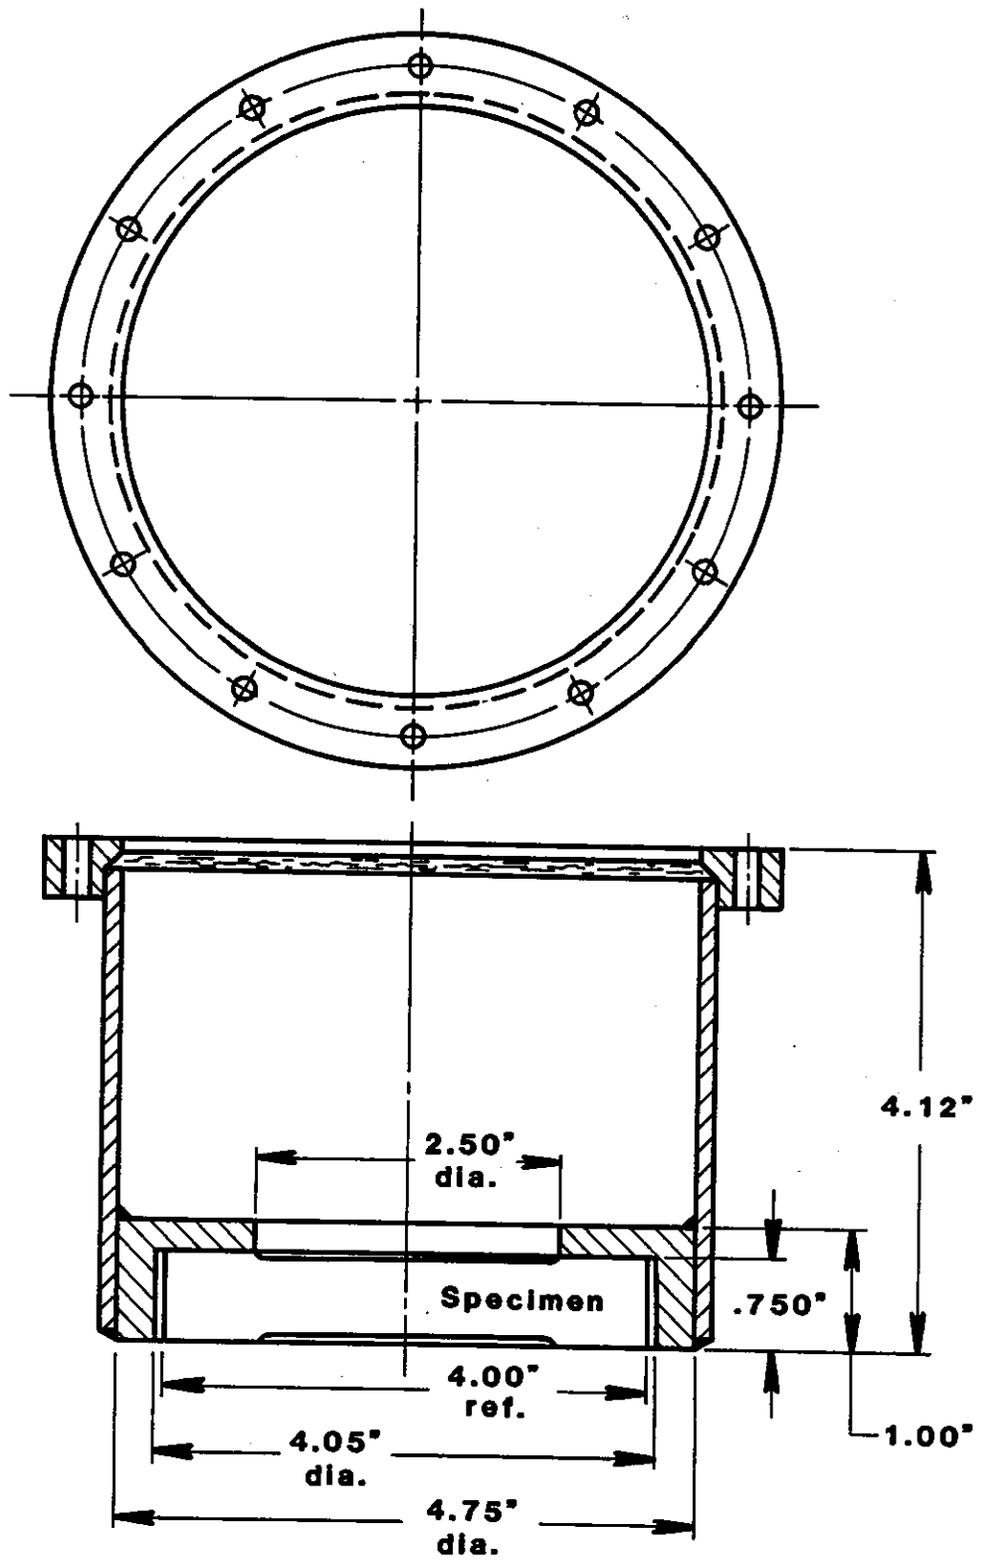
Type B fixture for glass lens adhesive specimen. Closure flange not shown.
